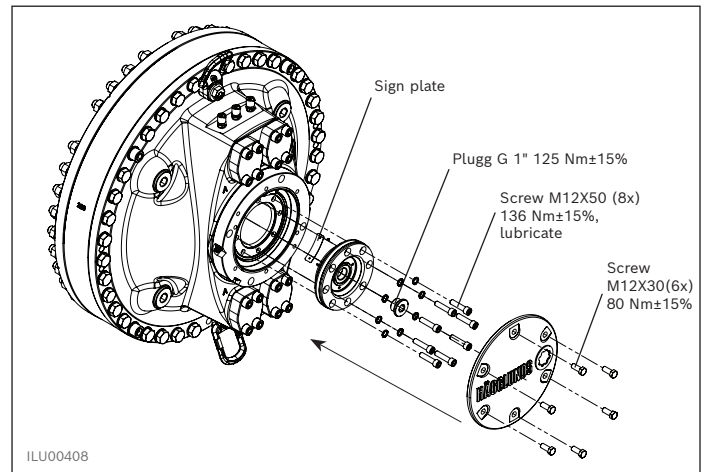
SPDC magnetized bearing holder, sign plate and cover
